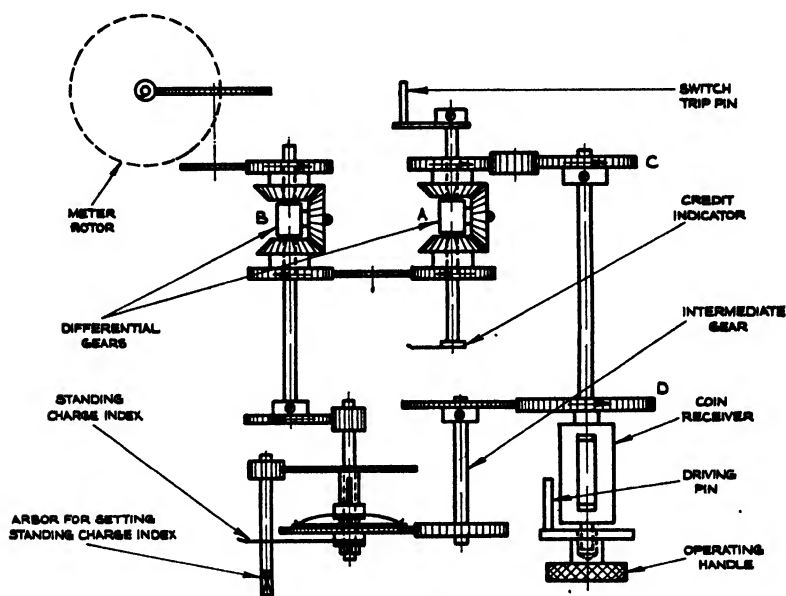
Arrangement of gearing in Chamberlain & Hookham step-rate prepayment meter.
